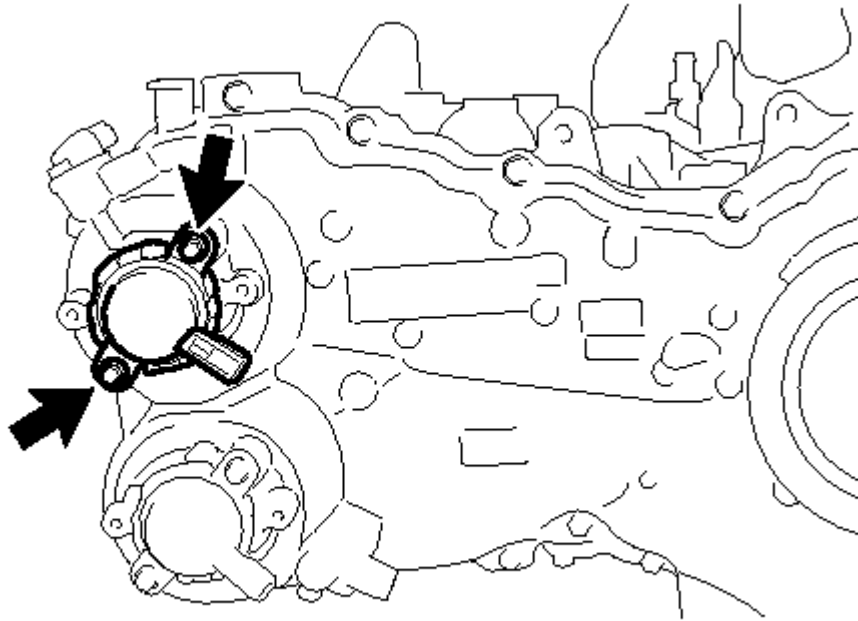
Bolt And Vvt Sensor (For Exhaust Side Of Bank 2)
